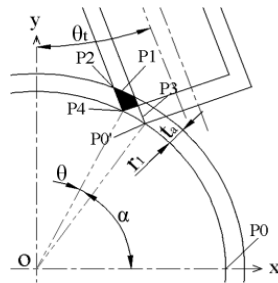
Schematic of sectional cutting chip area in the flat endmilling
